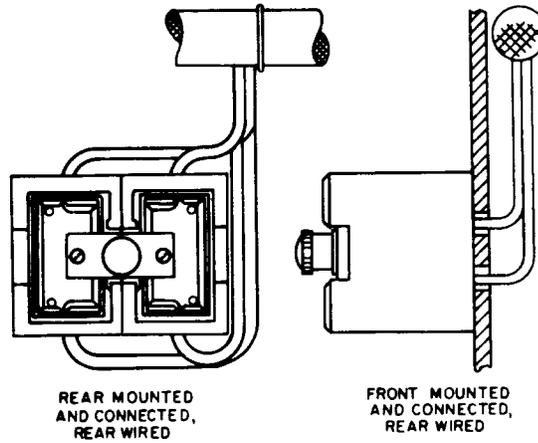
Connecting Blocks — ED-80504-01 and Similar Types — No. 14 Gauge and Smaller Wires
